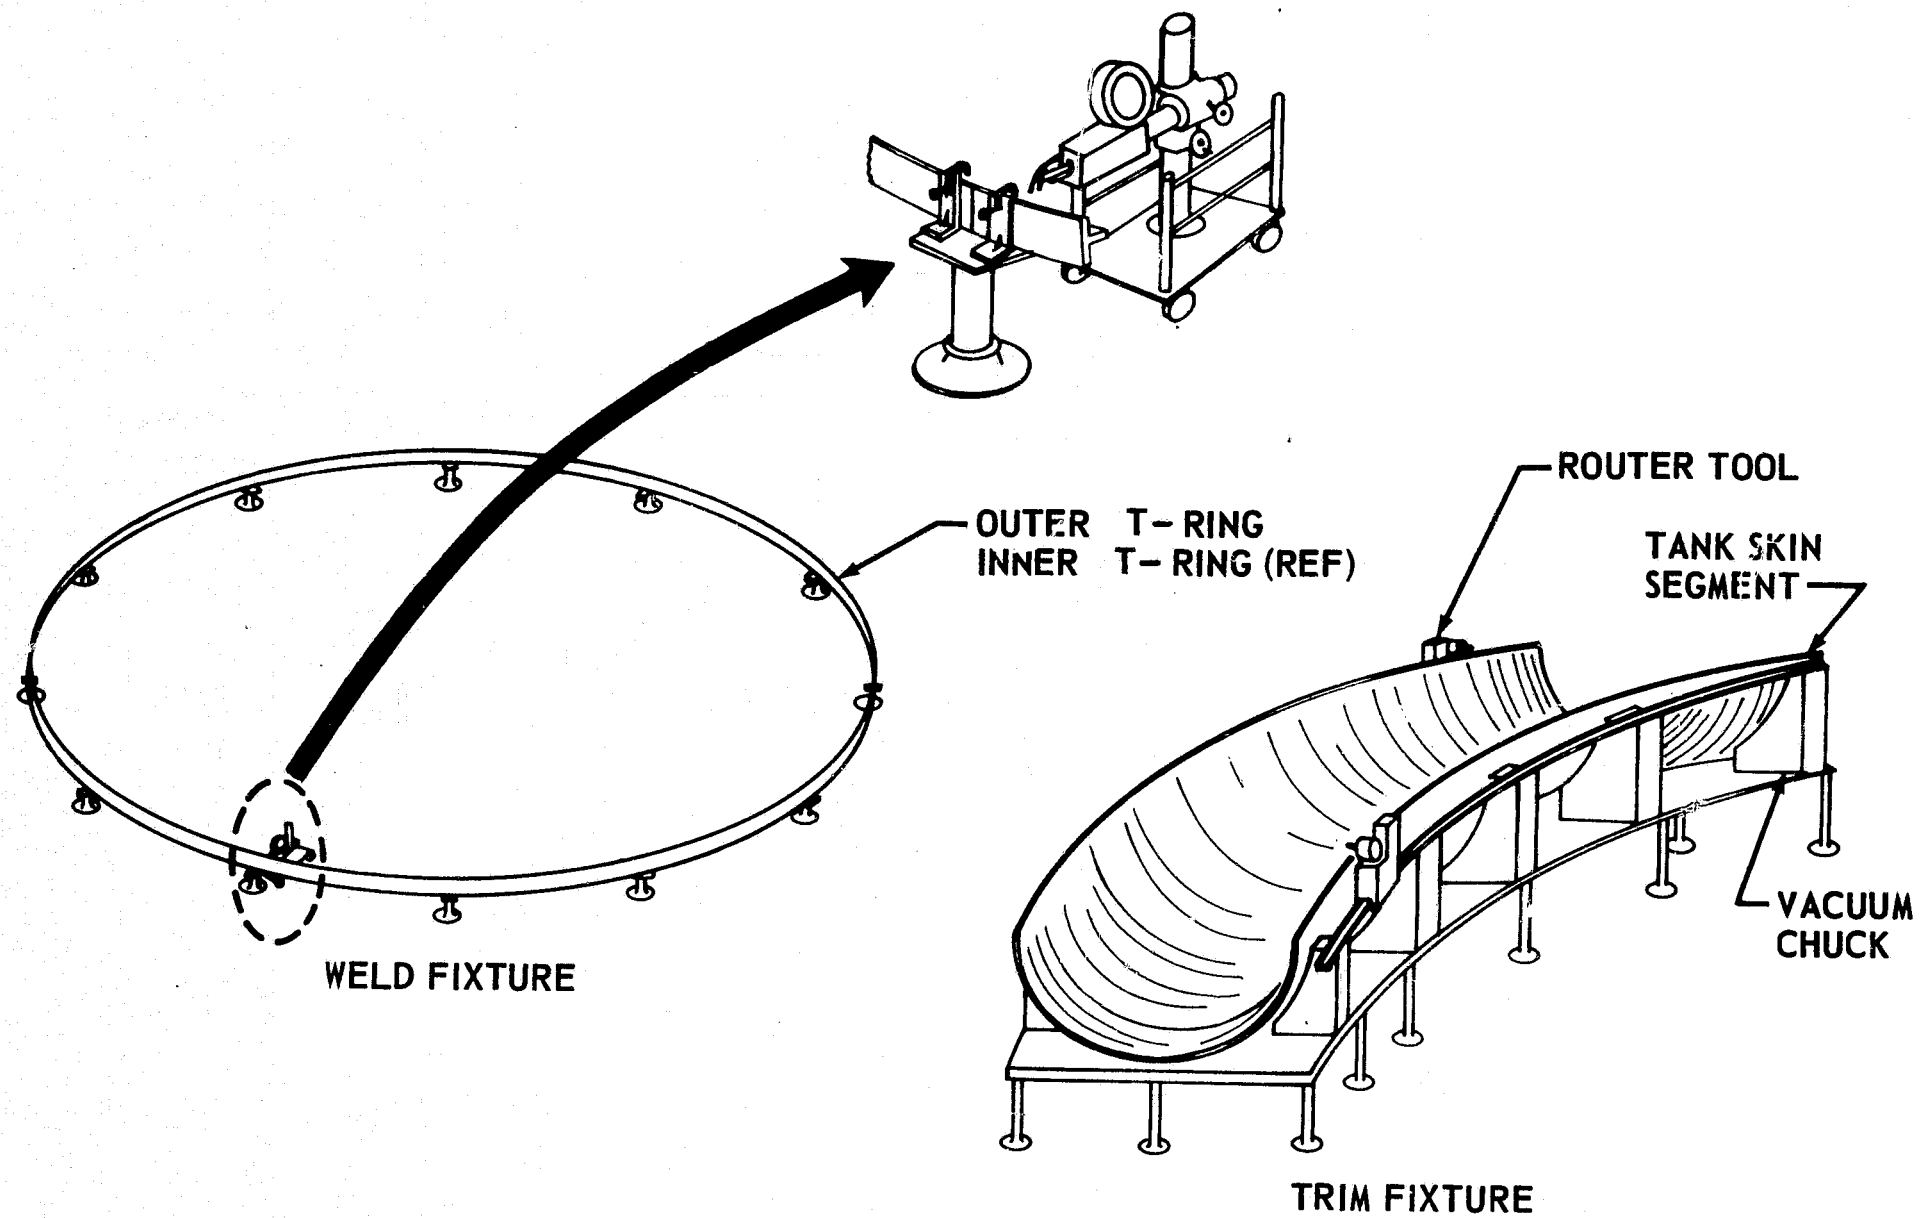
T-RING WELD FIXTURE AND TANK SKIN TRIM FIXTURE
